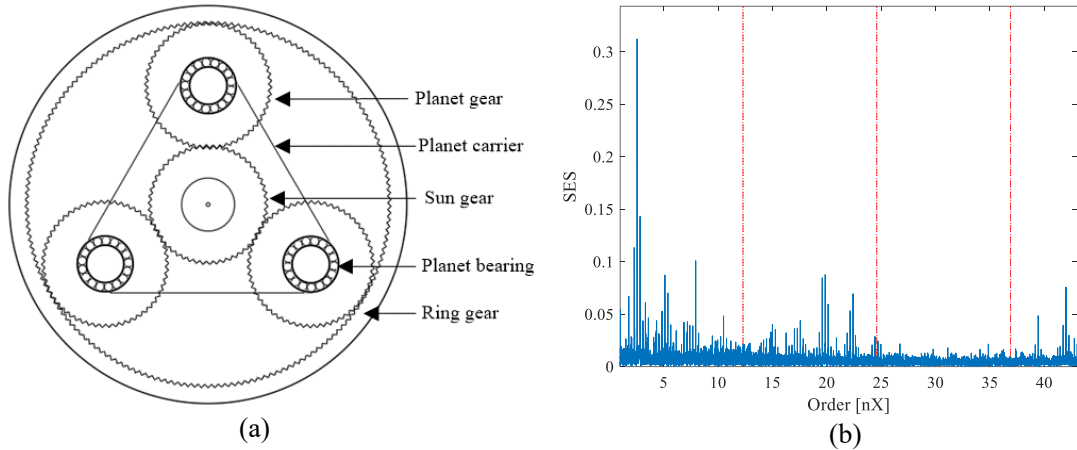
(a) The schematic diagram of the planetary gearbox; and (b) the SES of the outer race faulty planet bearing
